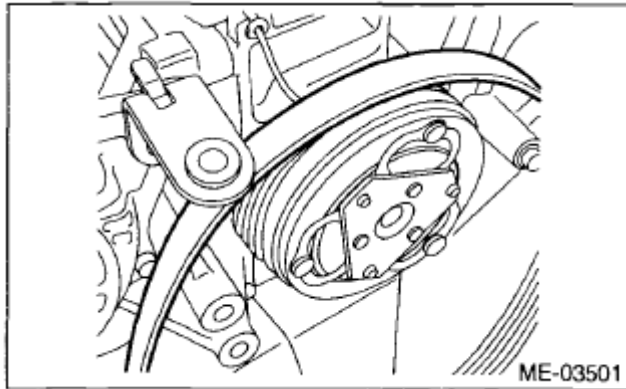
Hooking Rear Side Belt On A/C Compressor Pulley
